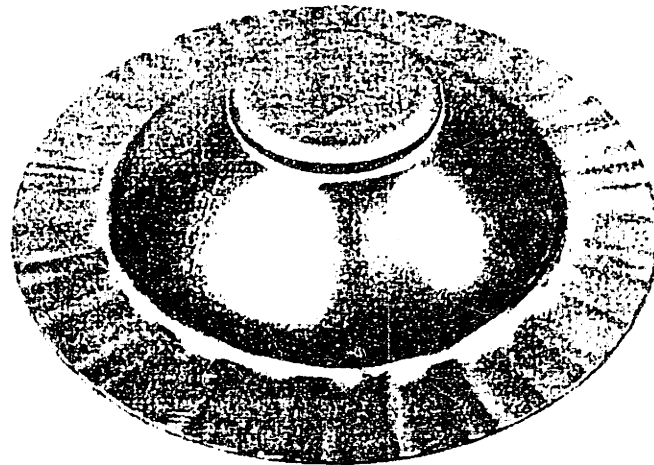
Cylindrical Cup Forming Machine Geometry
